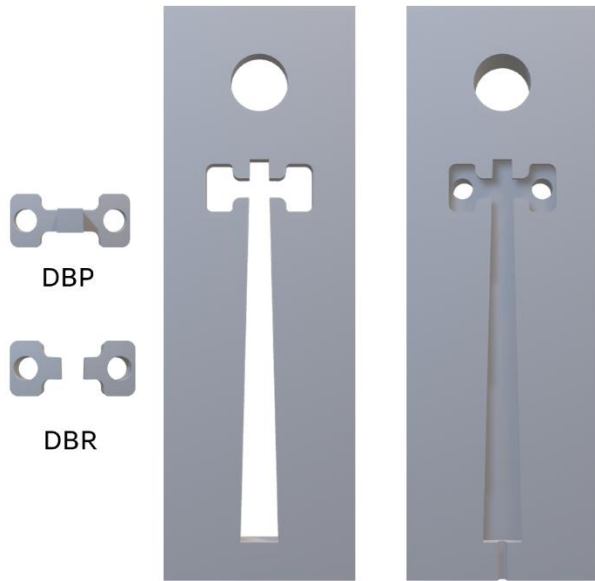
Mold of the soft gripper with DBP and DBR on the right
